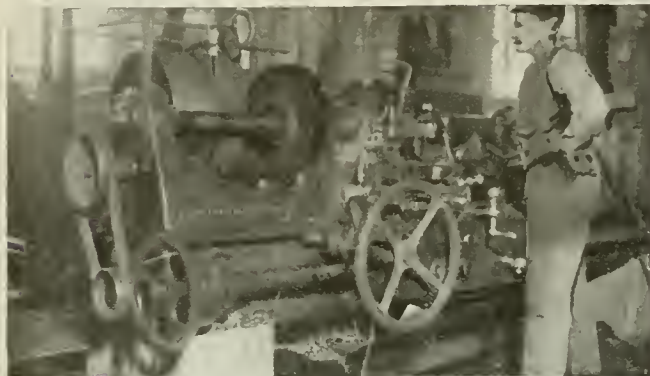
ROUGH TURNING ON "GOULD & EBERHARDT" MACHINE.
